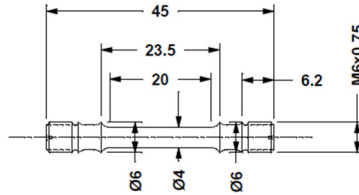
Geometry of the cylindrical specimens used for tensile tests [2]. Dimensions in mm.
